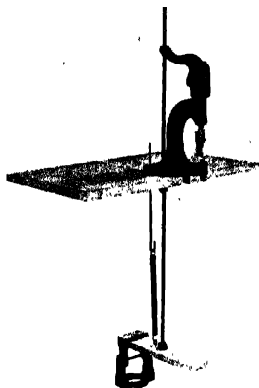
Foot-operated riveting machine (Bifurcated and Tubular Rivet Co., Ltd., Aylesbury)
